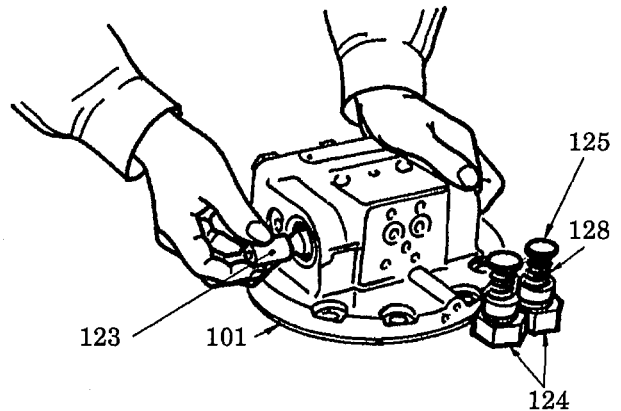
Removing spring retainer (125), spring (128), spool (123)
